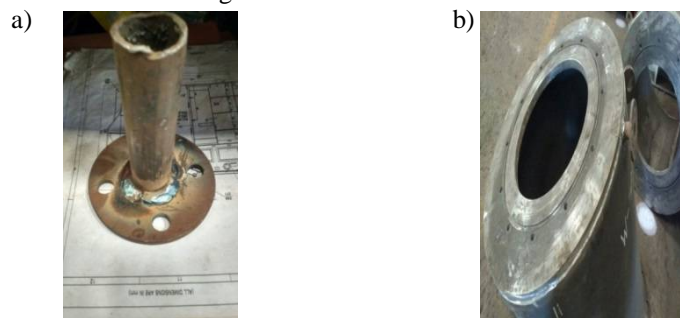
a) Pipe Flange b) Pipe Flange welded with transformer assembly
